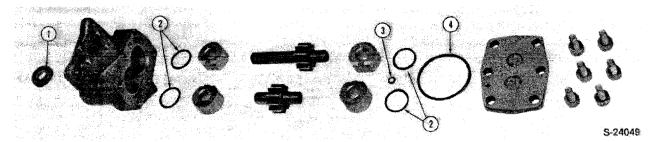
Power Steering Pump Components 1320-1520 Tractors
